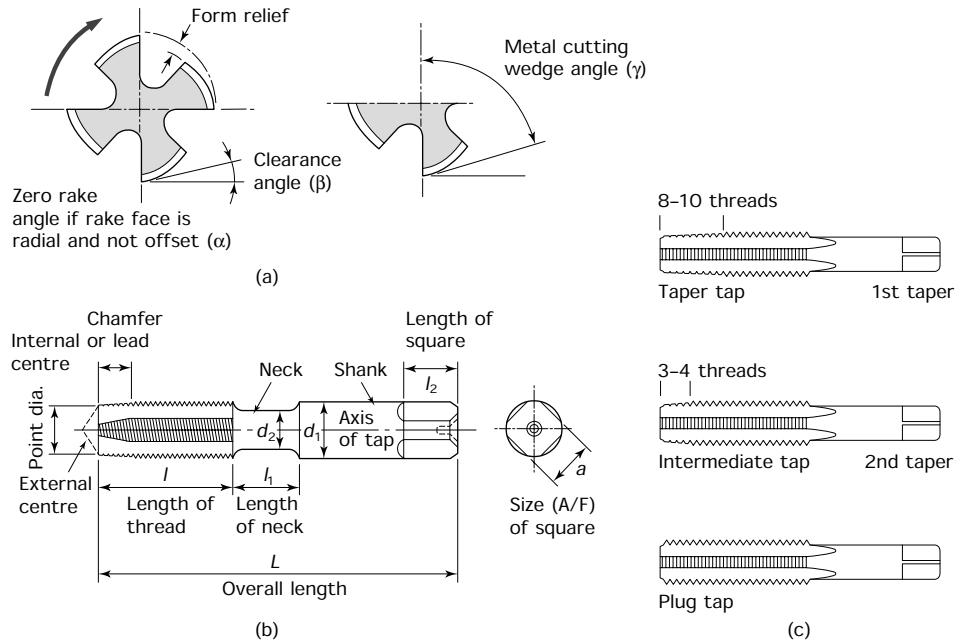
Screw thread taps: (a) cutting angles applied to a thread cutting tap; (b) nomenclature for taps; (c) set of thread cutting taps
